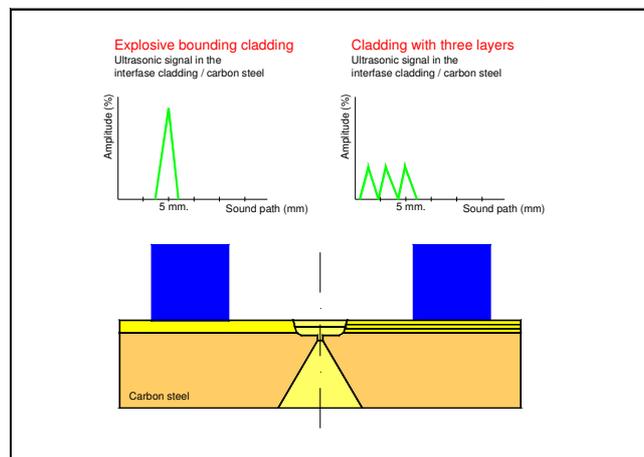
Two different types of cladding at both sides of a pipe weld.
